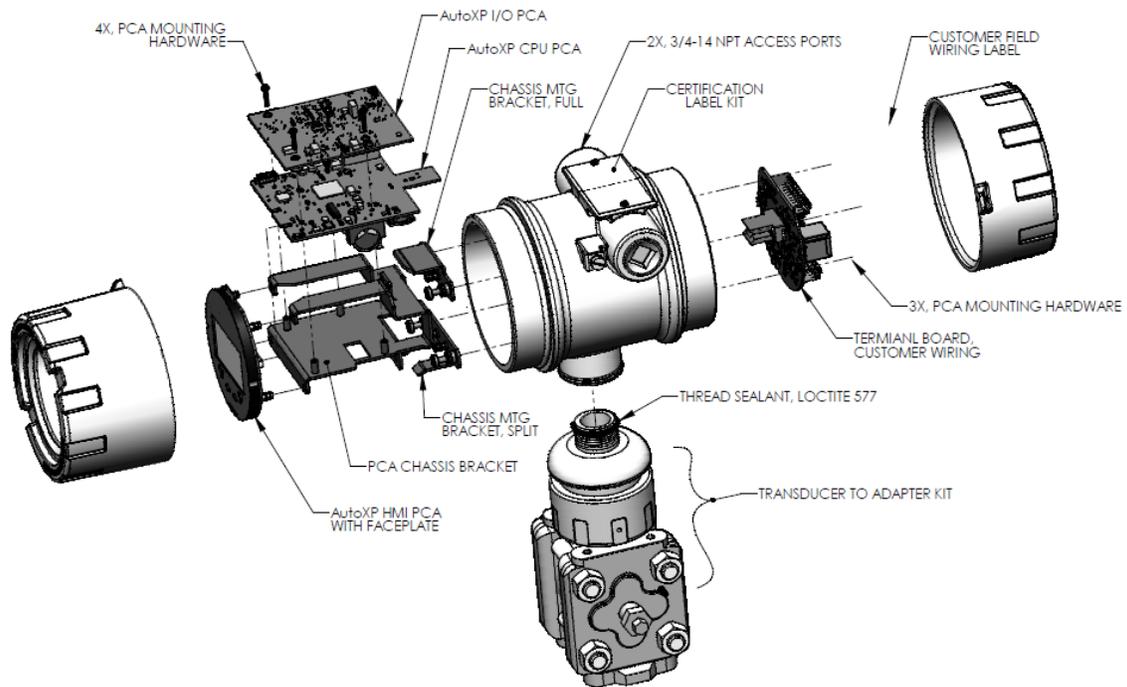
AutoXP exploded view / Vue éclatée AutoXP
